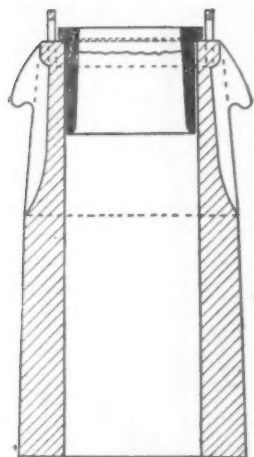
The Gathmann Design of Ingot Mold With Sinkhead and Large End Down
